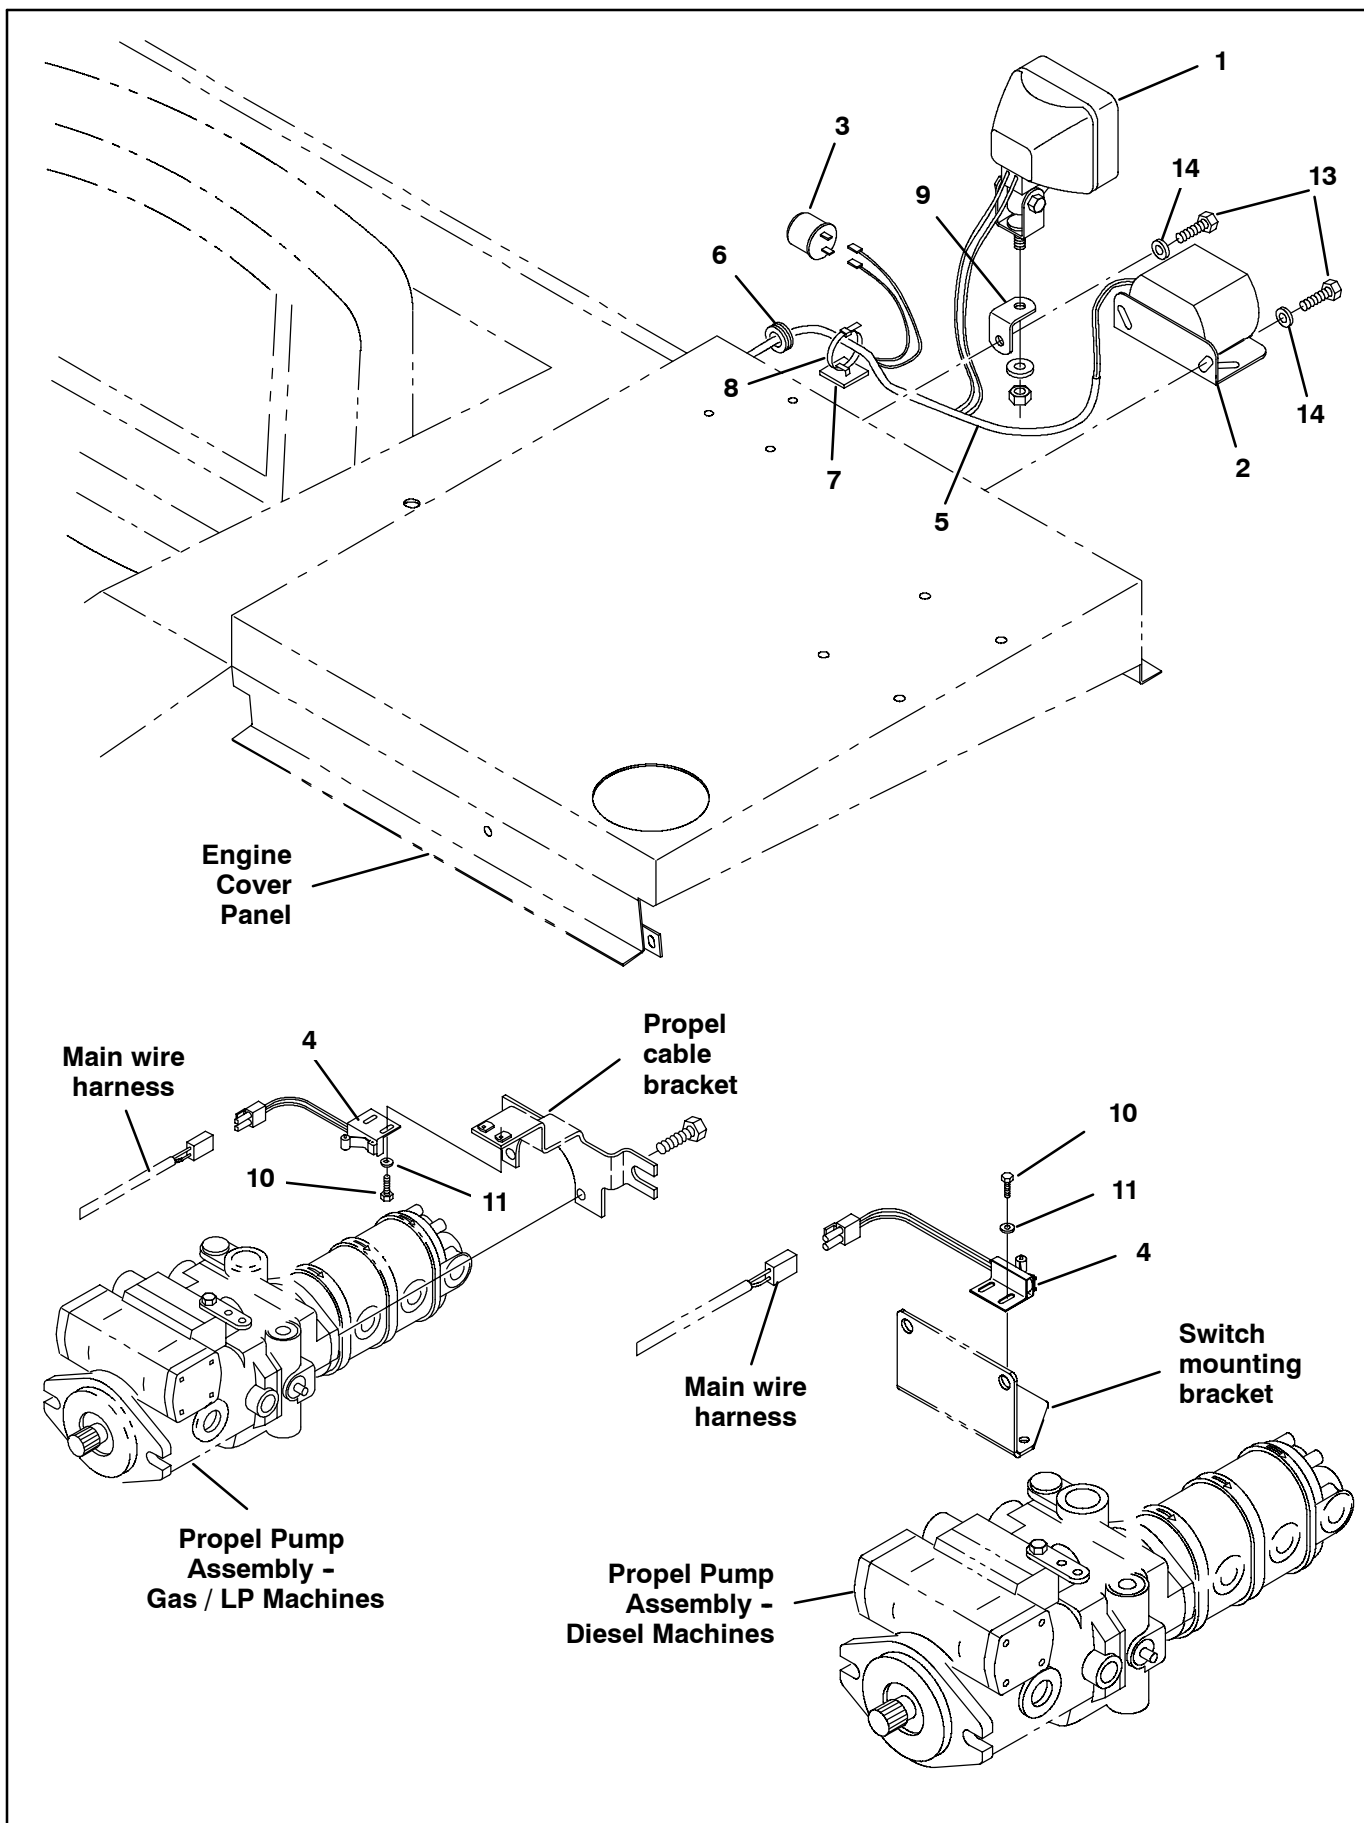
Backup Alarm Assembly on Engine Cover Panel
